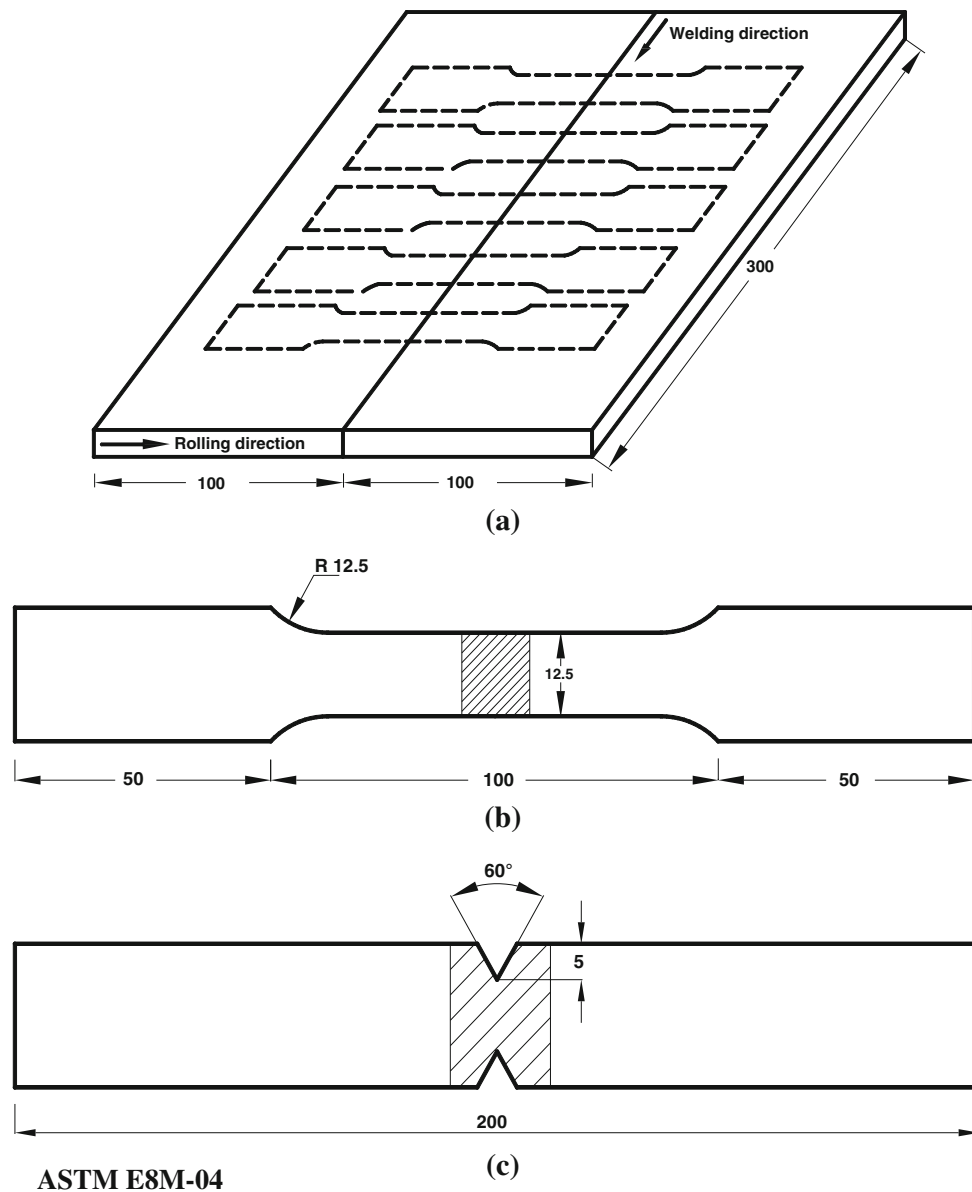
Dimensions of tensile specimen: (a) Scheme of welding with respect to rolling direction and extraction of tensile specimens, (b) Dimensions of flat smooth tensile specimen, and (c) Dimensions of flat notch tensile specimen
